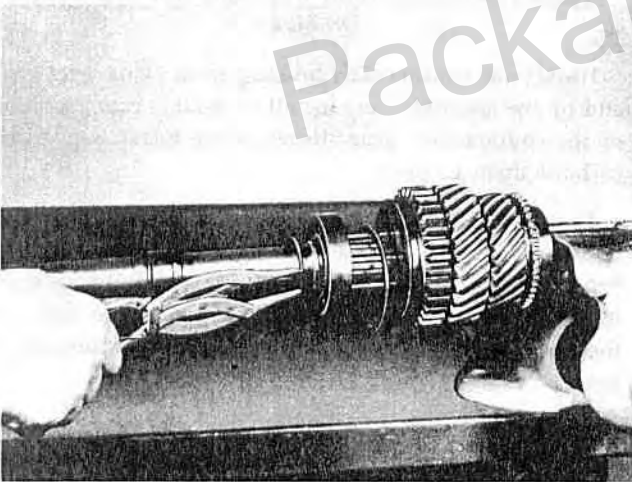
Installing the Transmission Main Driving Shaft Rear Bearing Snap Ring
